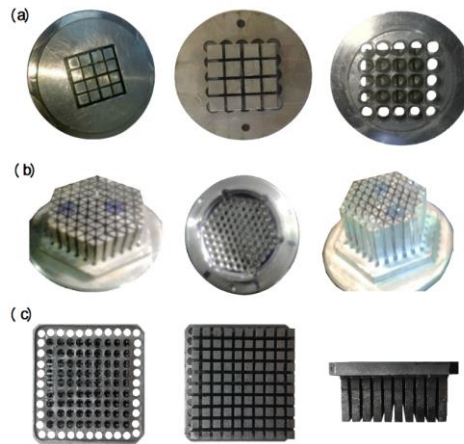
General view of the manufactured technical tooling for extrusion (matrix)
